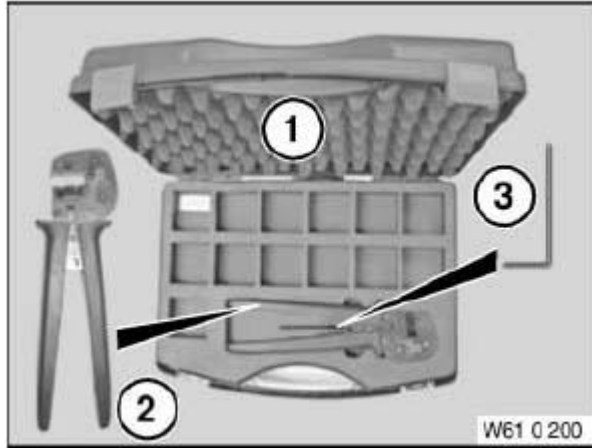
Identifying Crimping Stop Parts (Large Contacts)
